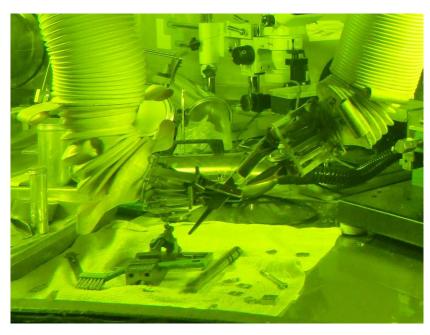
Deburring a laser weld specimen using a file after the cutting
